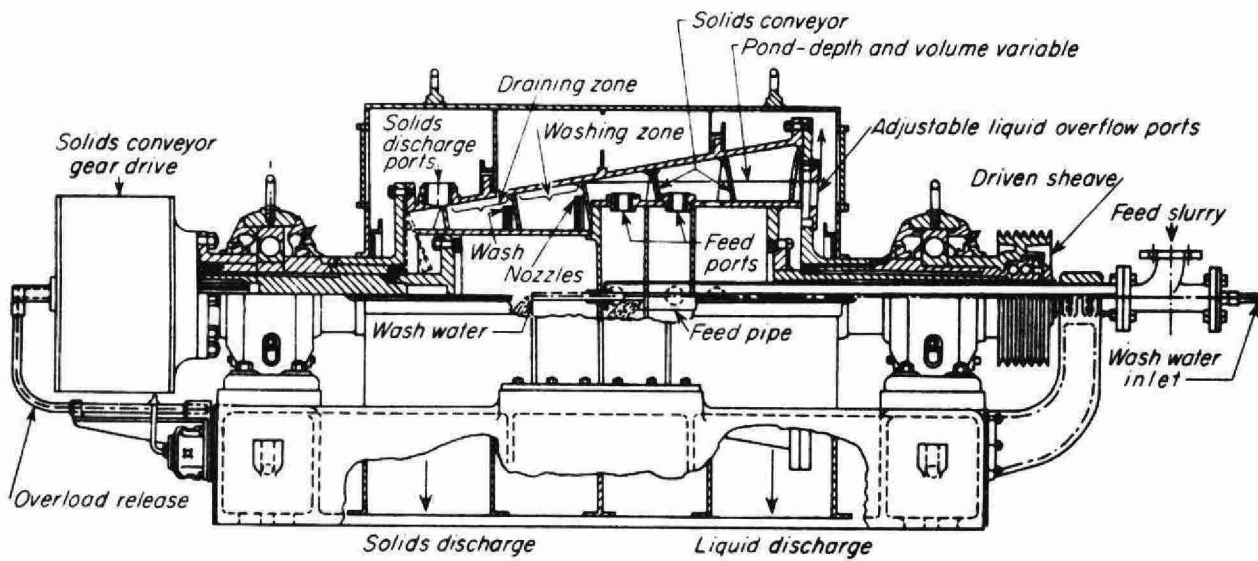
Solid Bowl Centrifuge (Bird Machine Co.)
